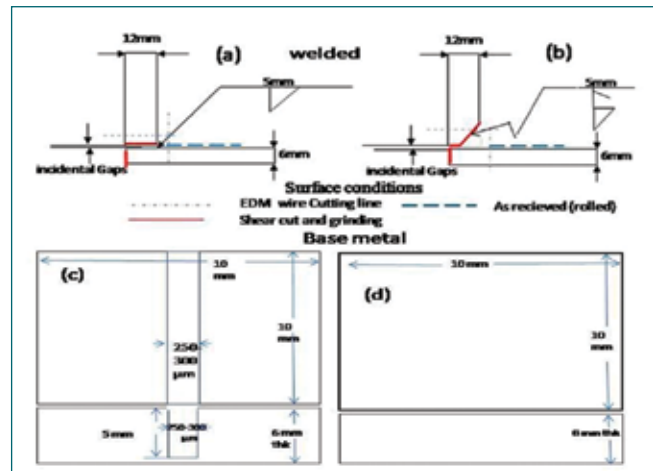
Drawing of samples for corrosion testing (a) fillet weld joint, (b) groove fillet, (c) base metal with groove (c), & without groove(d)
